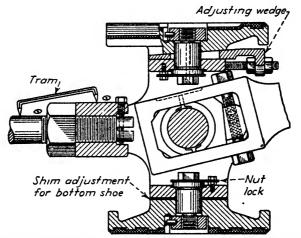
Wedge adjustment on crosshead shoe. (Courtesy of Ingersoll-Rand Co)
